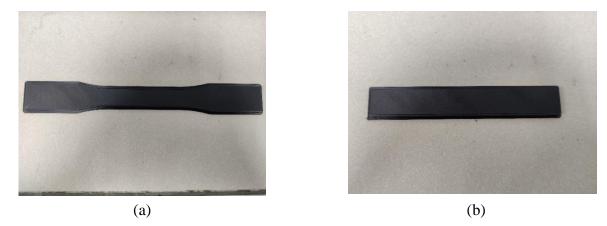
(a) 3D printed dog bone specimen (b) 3D printed bending specimen
